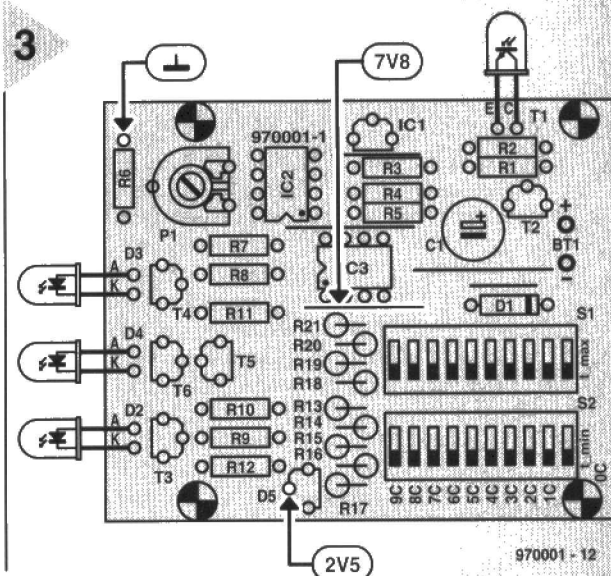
Drawing of the completed prototype PCB. Note that some test points have been identified.
